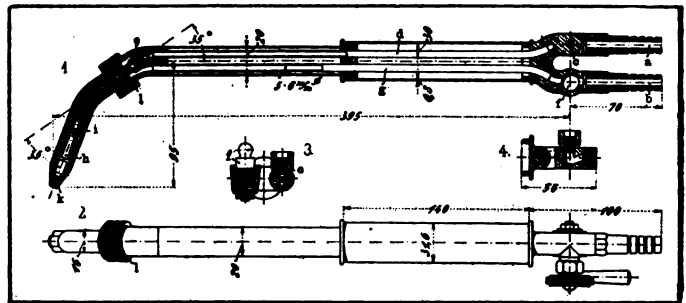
Autogenous welding tool—dimensions in millimeters
